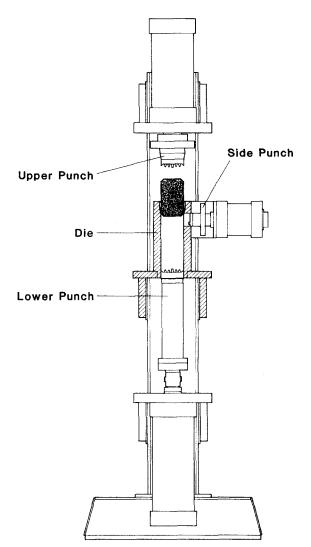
Consolidation press for RR119/B pellet — Cross section of press showing pellet resting in die after lower punch has been separated.
